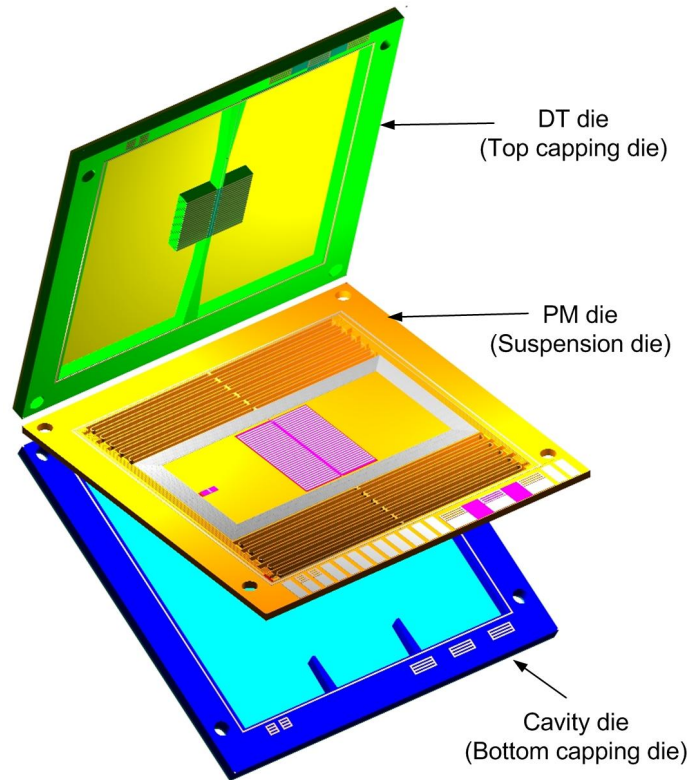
Exploded view of the capping and proof mass dies. The DT (Differential transducer) die contains the drive LCAT electrodes. The cavity die is underneath the suspension die and is required for vacuum encapsulating the suspension.
